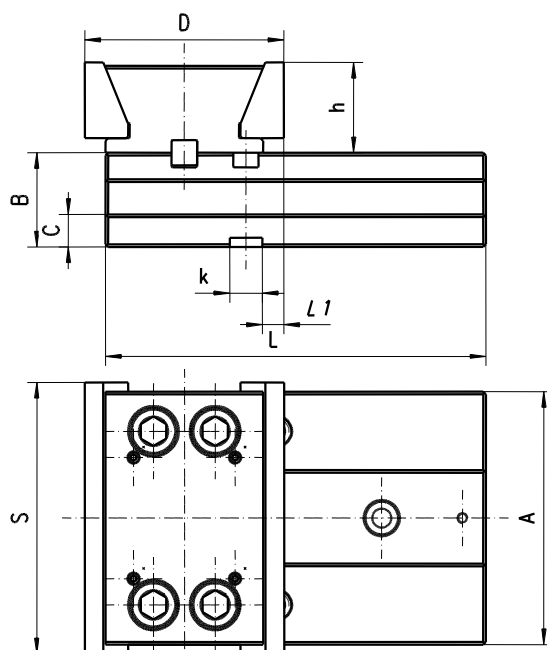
Basic dimensions of precision machine vises- type 6624.
